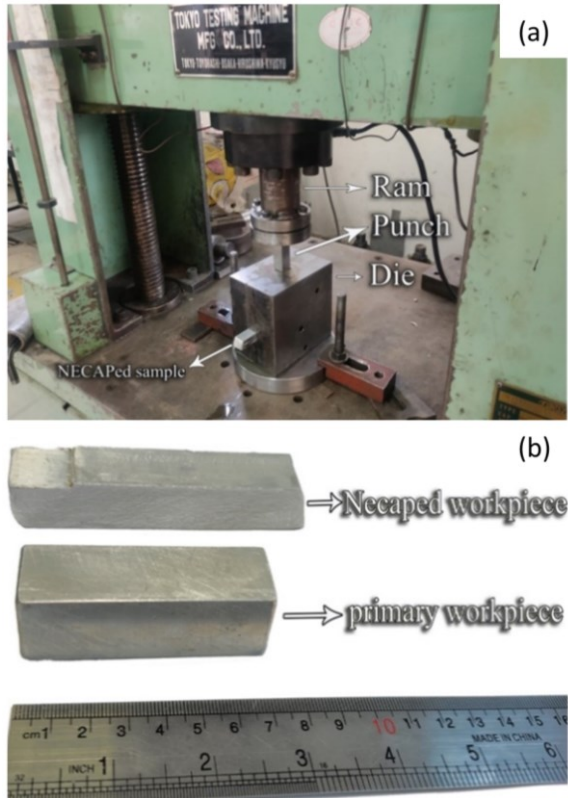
(a) The NECAP die and the press machine (b) primary and the NECAPed workpieces.
